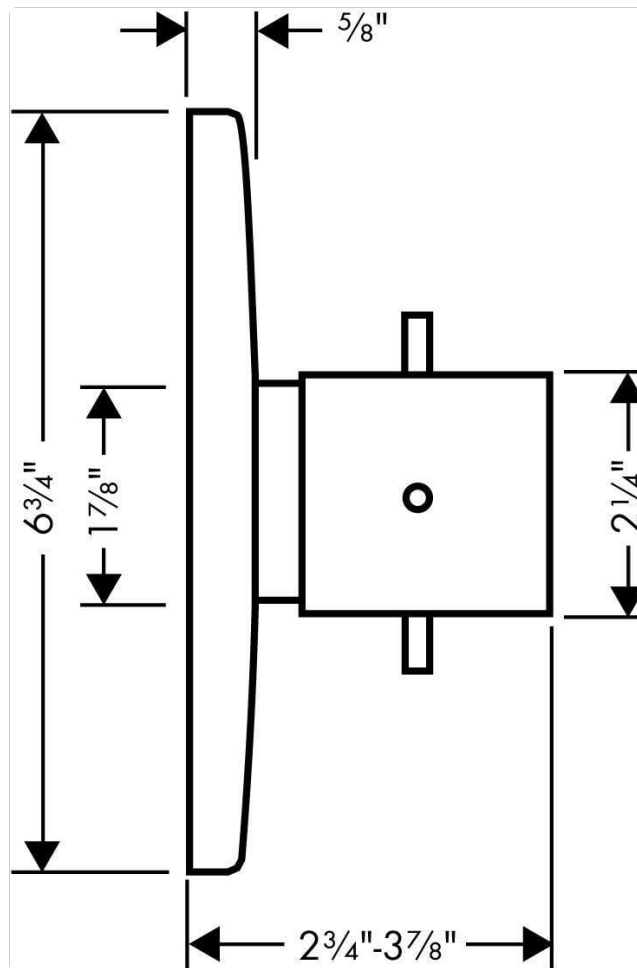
Dimensional drawing illustrating the measurements and installation depth of the Axor Starck Thermostatic Valve Trim.
